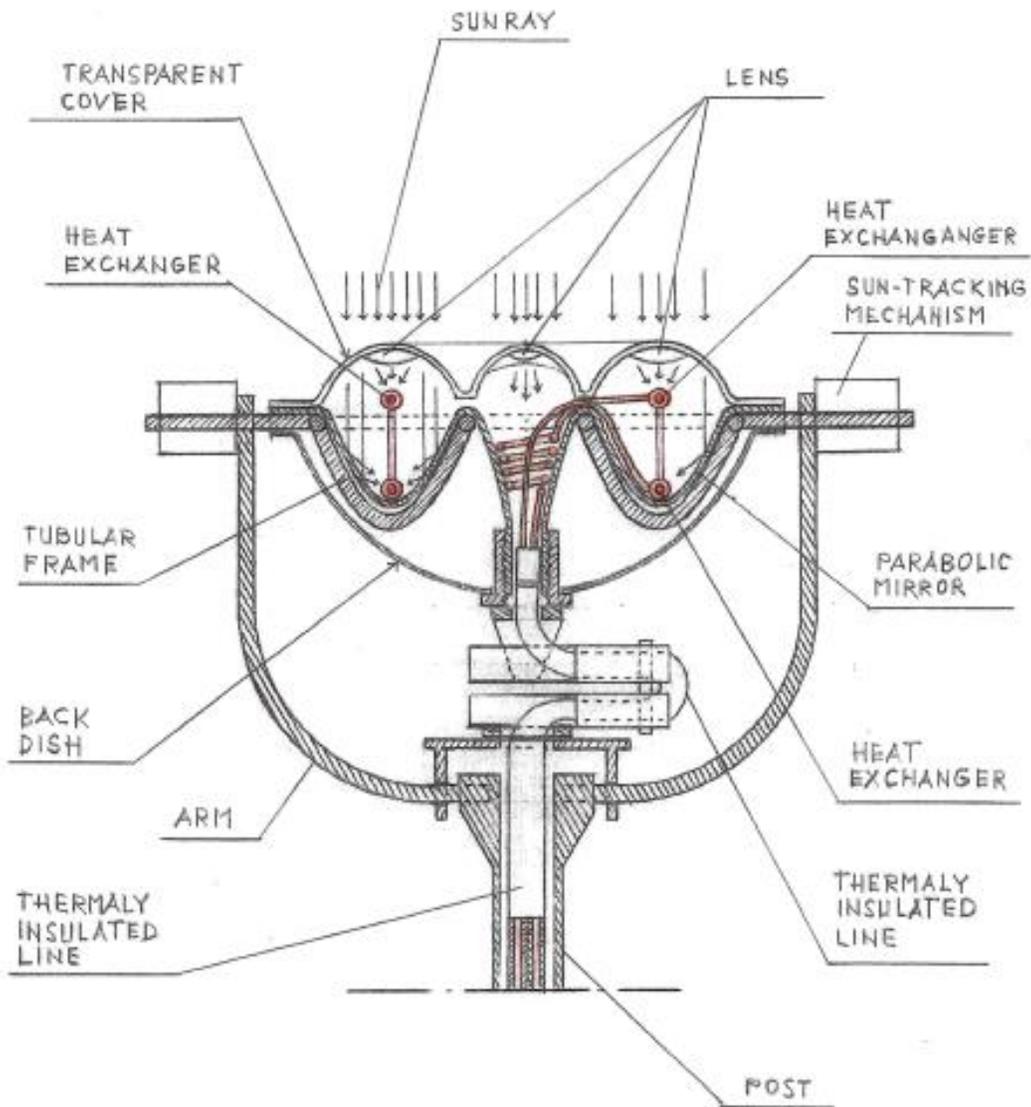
Cross-sectional View of the "Thermo-Optical Solar Dish"
